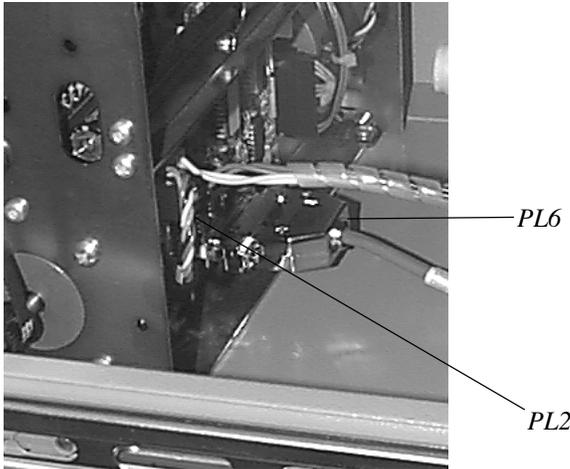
Removing the Dispensing Mechanism from the Cash Dispenser
